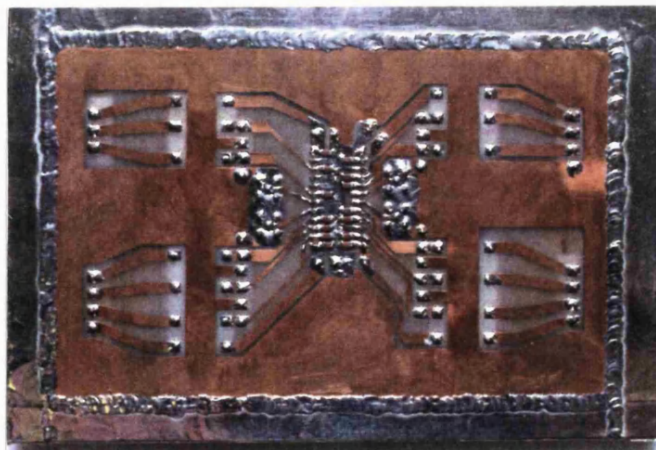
Bottom side of a typical PCB used for testing the OS/H circuits.
